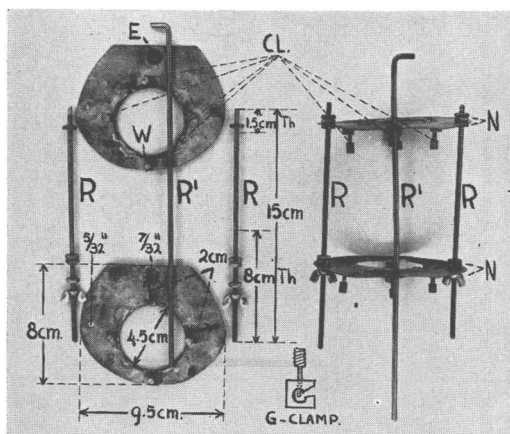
Double-yoke harness. E = Eyelet for iron rod (R'). CL = G-clamps. W = Steel wire. R = Brass rod. Th = Thread on brass rod. N = Nut.
